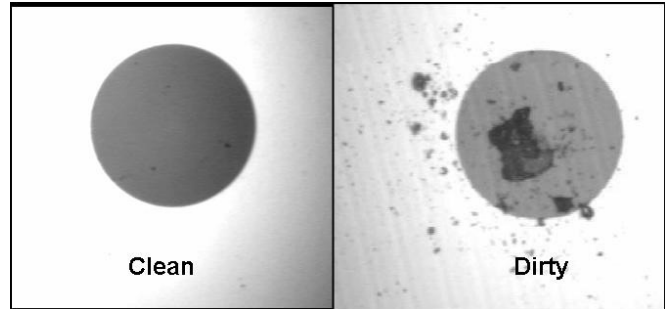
Examples of clean and dirty connector end faces as viewed with an inspection scope.
